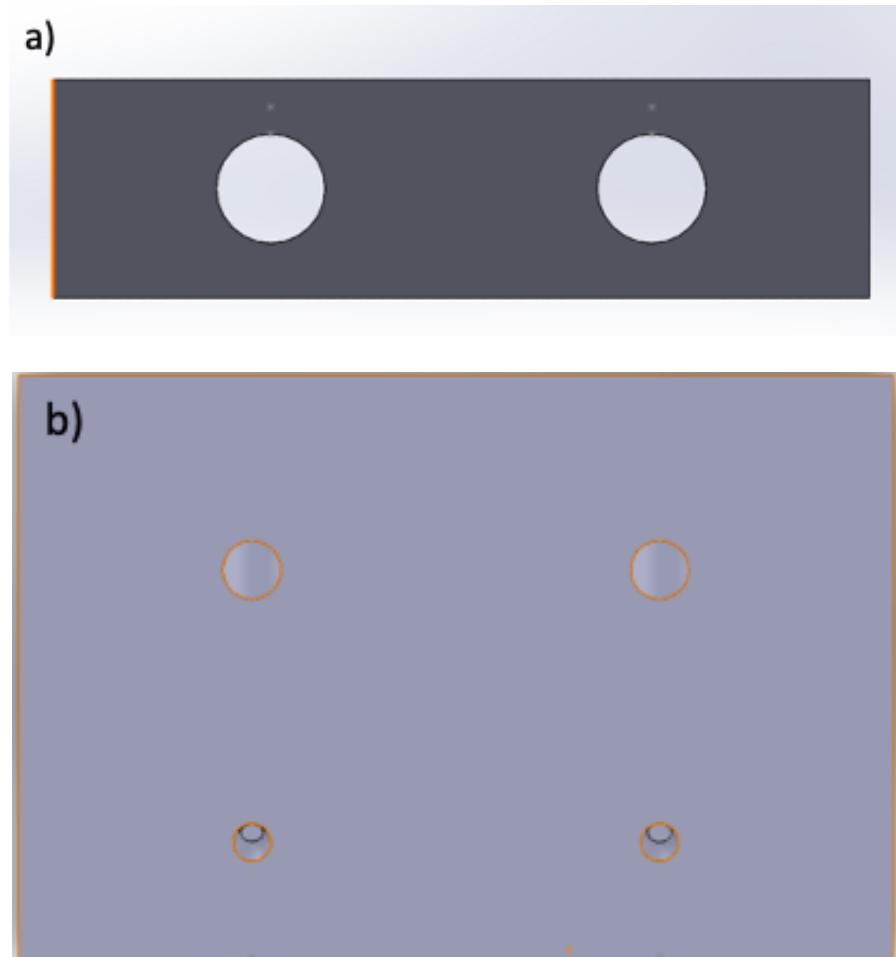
Figure 9a depicts the side view of the connection test piece where the Luer locks would be attached. Figure 9b shows the top view of the piece where the membrane would be attached. The large hole was used thread excess wiring out of the top, so it was not in the main channel.
